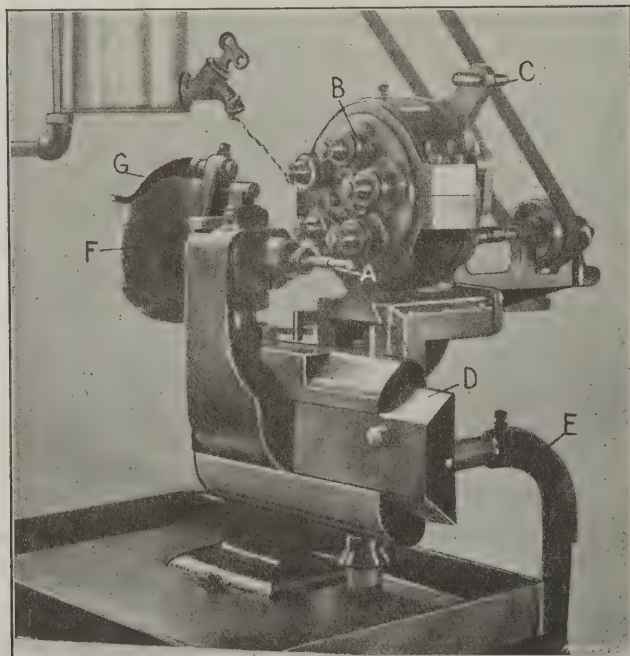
Machine for Cutting Brass Escape Wheel Teeth
